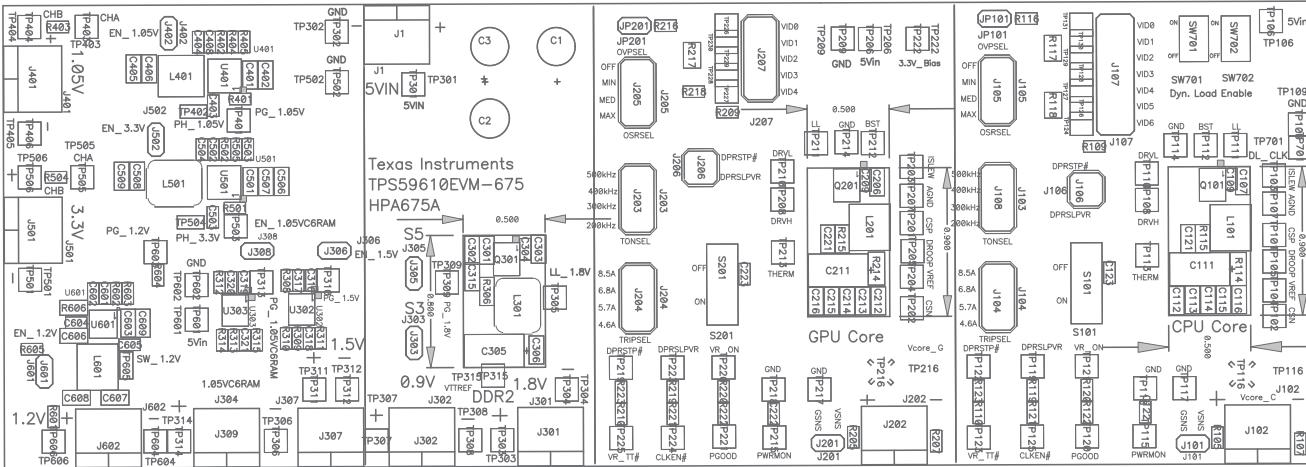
TPS59610EVM-675 Top Layer Assembly Drawing, Top View
